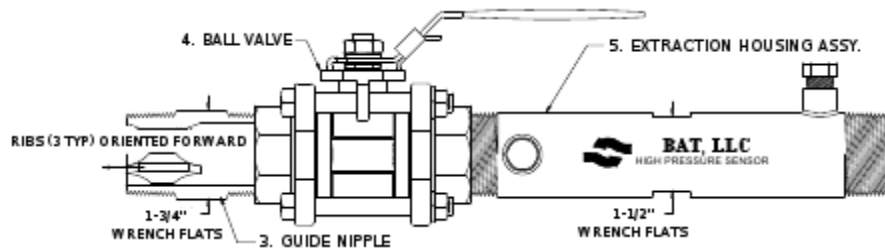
Hot Tap Partial Assembly 1 (Nipple-Ball Valve-Extraction Housing)
